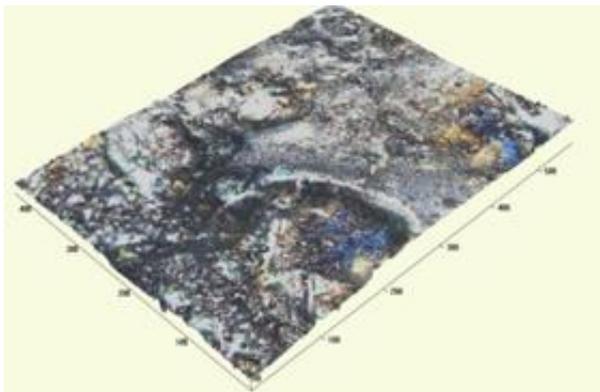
(a) 3-D profile of machined EN-31 sample by Al powder
